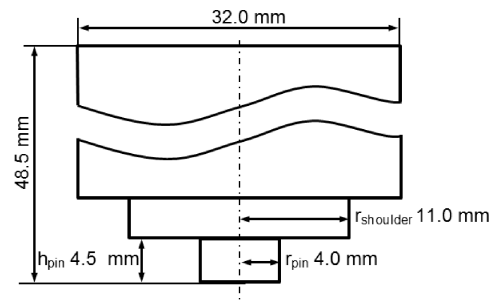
Schematic of the FSP tool indicating heat generating surfaces
